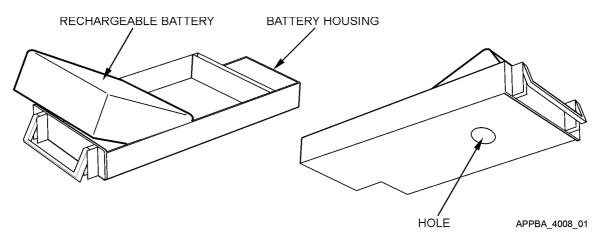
Remove Rechargeable Battery From Battery Housing Assembly
